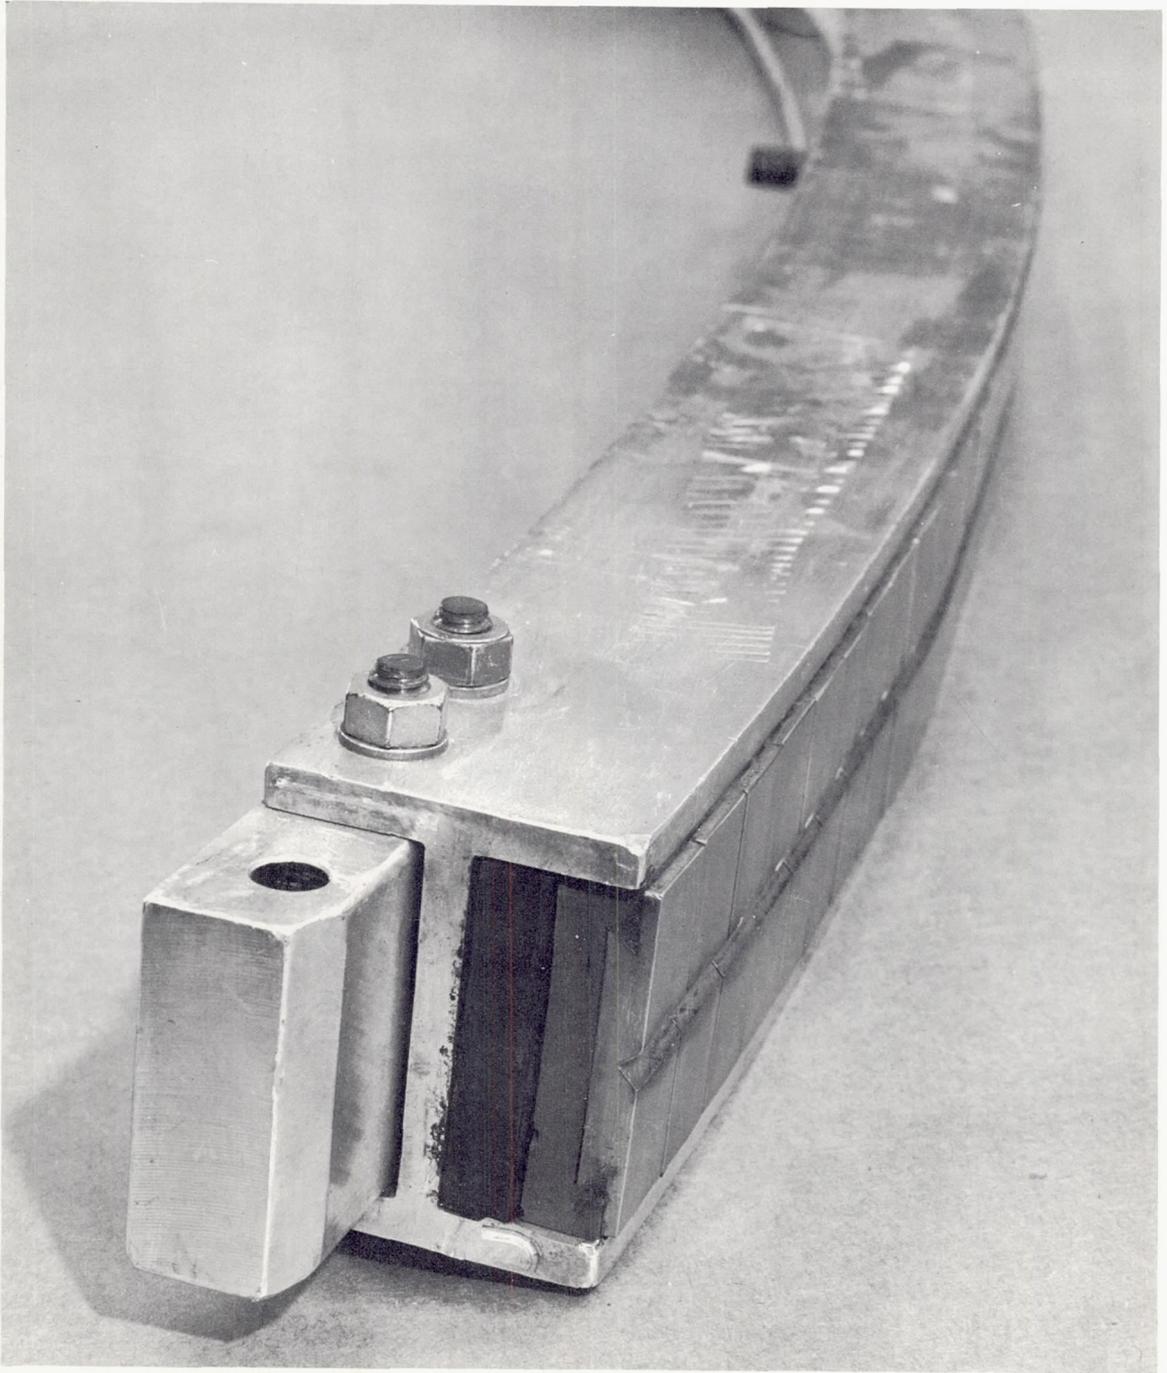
A 41-inch segment of an "H" member showing the end of the inflatable bladder and the laminated $\frac{1}{2}$ -inch stainless steel, flexible backup bar dovetailed into silicone rubber.
